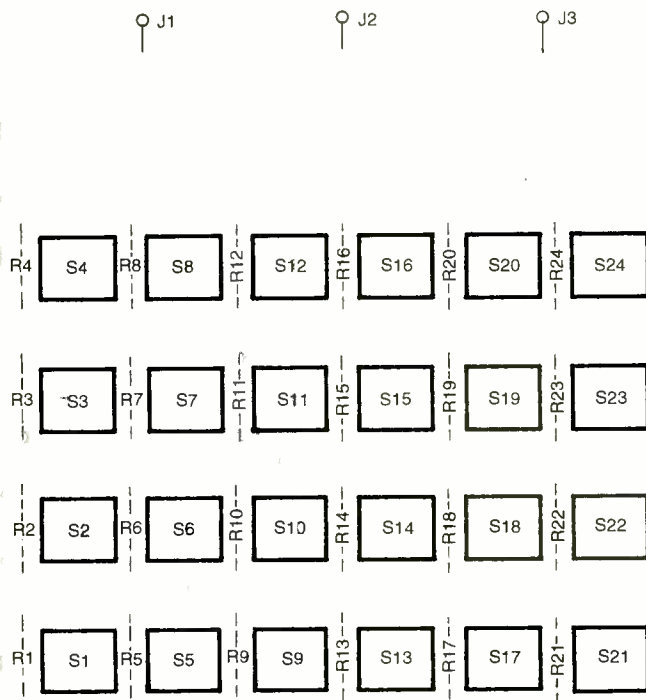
AS SHOWN IN THIS PARTS-PLACEMENT DIAGRAM, all of the resistors mount on the foil side of the board. That was done to make the R-Box small and convenient to use.
